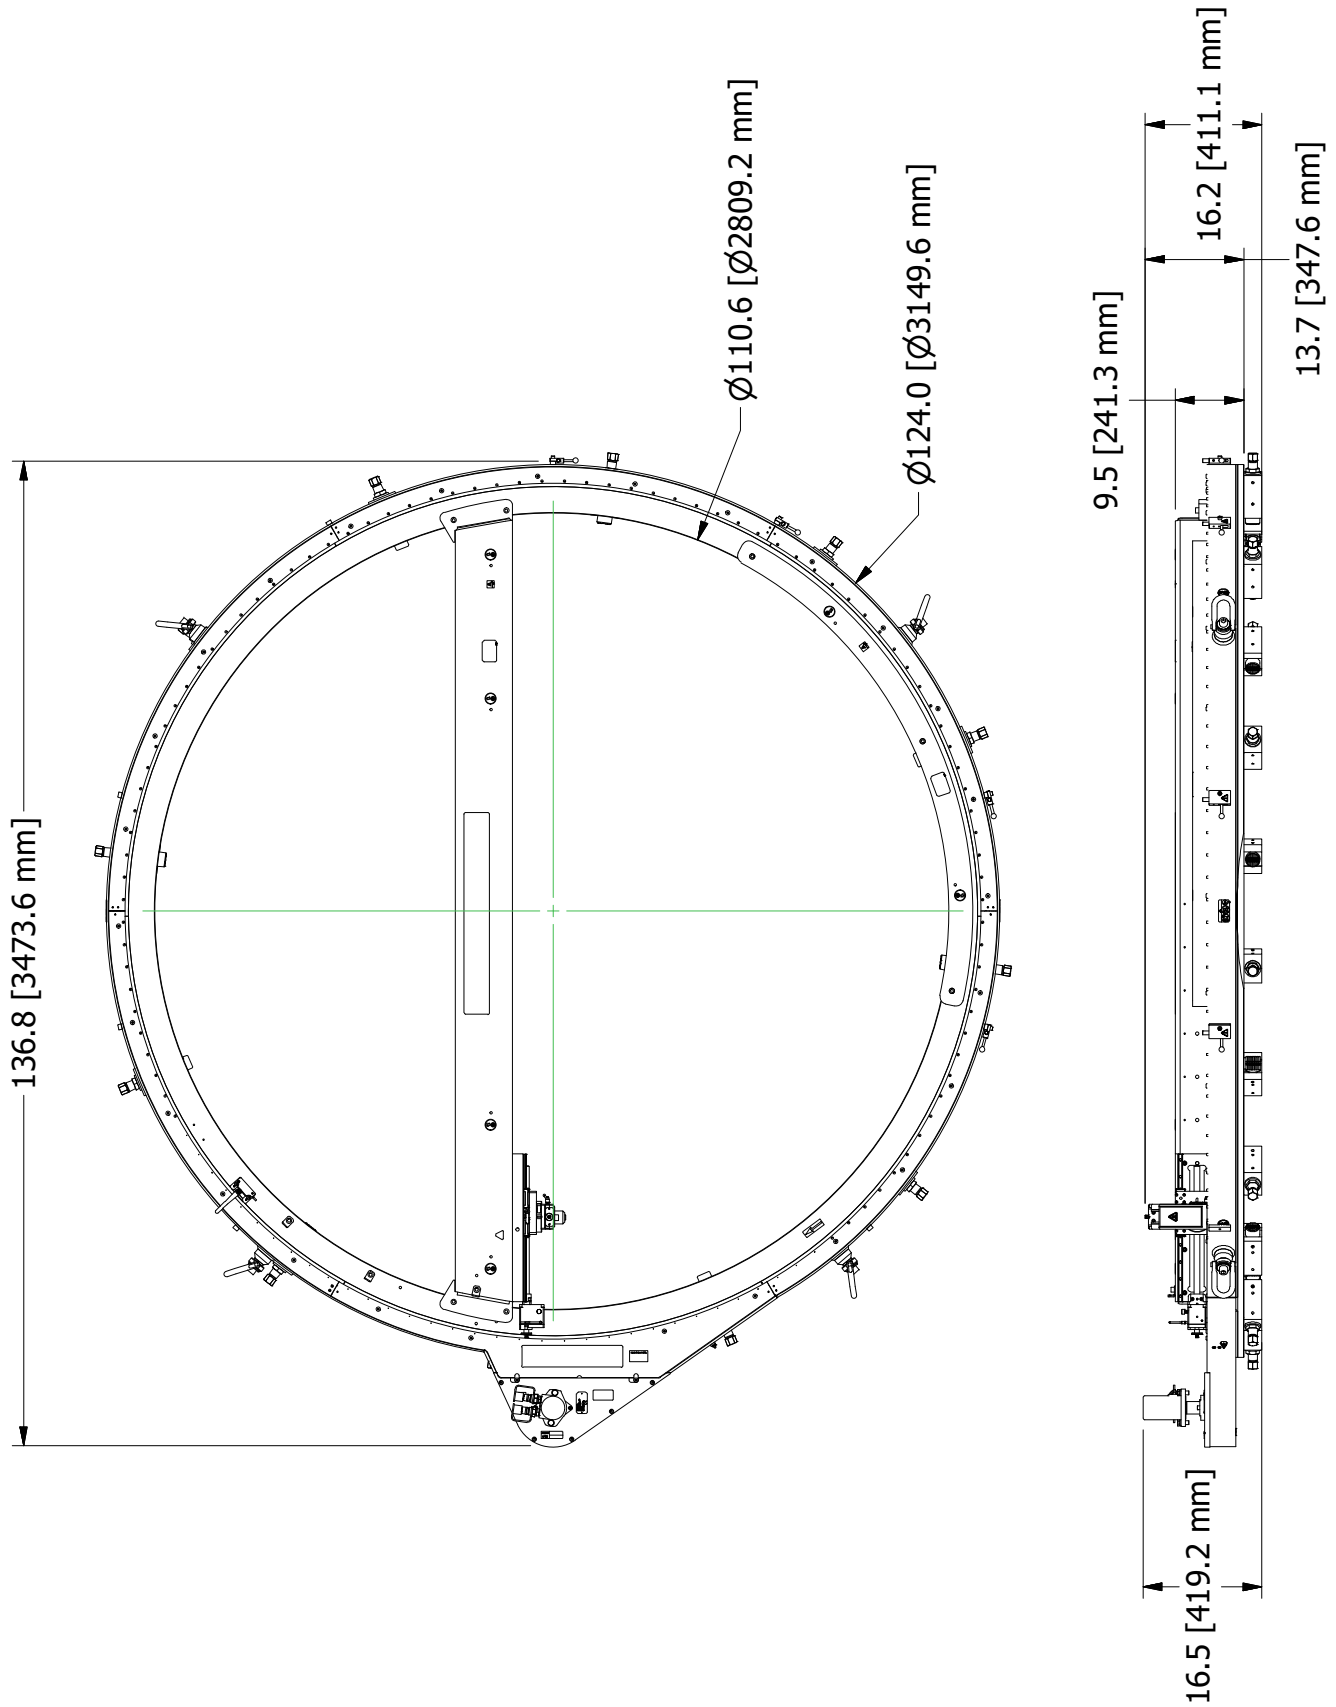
ODF110 SPEED FACER DIMENSIONS (P/N 93050)
